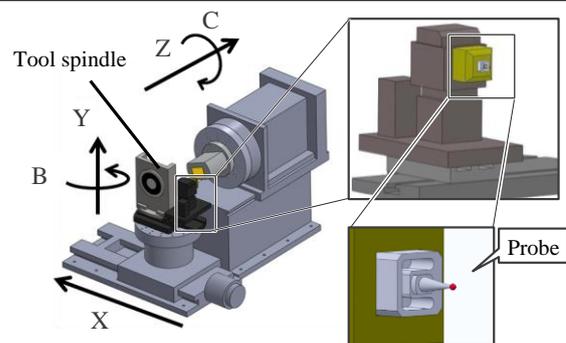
Ultraprecision machining center equipped with on-machine measurement device
